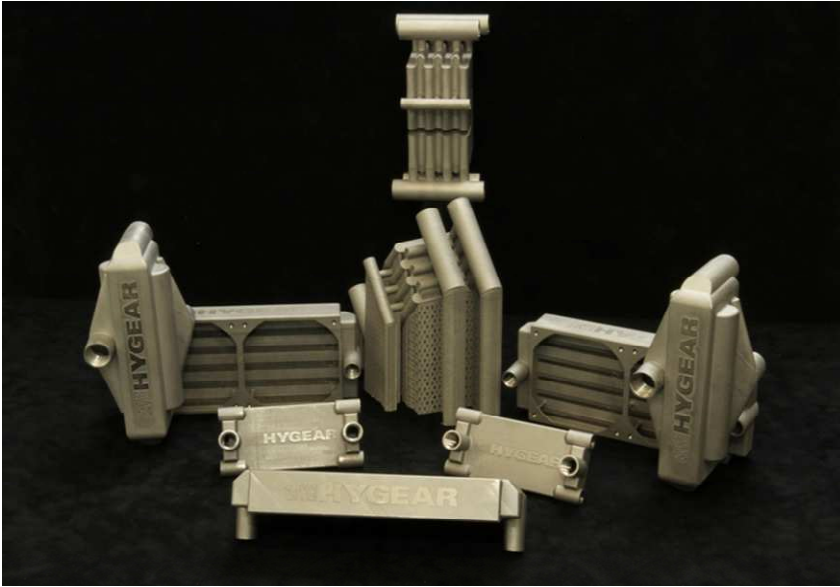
3D metal printed heat exchangers for the PURE system (Photo by Machinefabriek deVALK)
